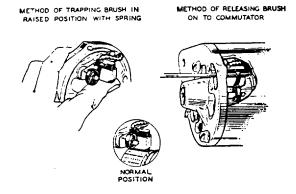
Fitting Commutator End Bracket to Yoke.
